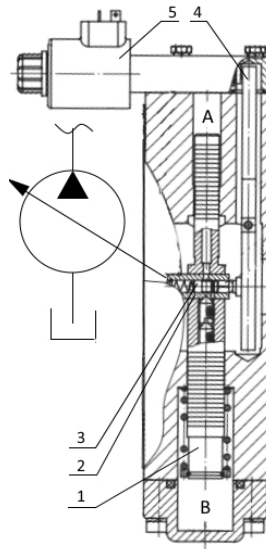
The electro hydraulic pump controller (controlled pump is shown schematically).
